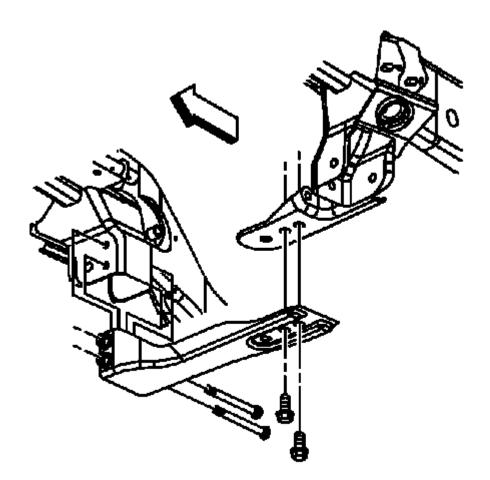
View Of Crossmember Bolts & Bar (4WD Only) Courtesy of GENERAL MOTORS CORP.
